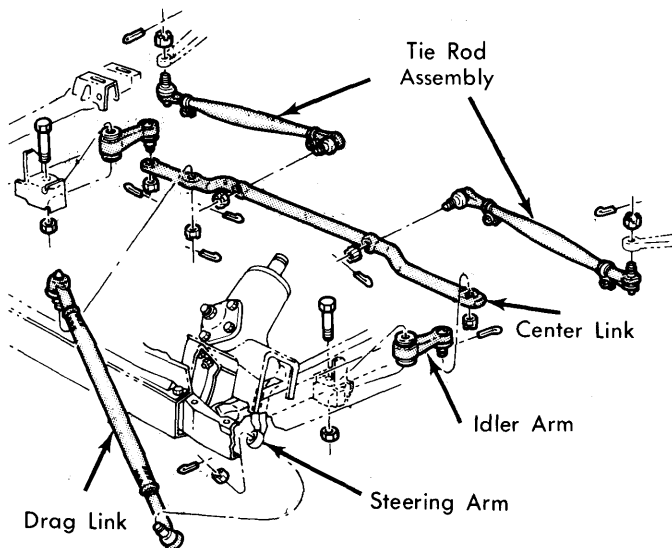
Disassembled View of Steering Linkage for "B", "CB", "MB" and "PB" Models
